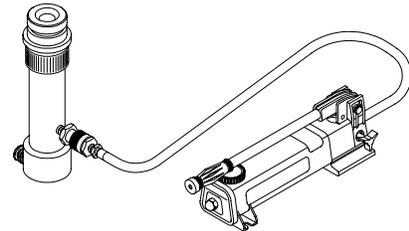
10 Ton Hydraulic Cylinder and Pump
